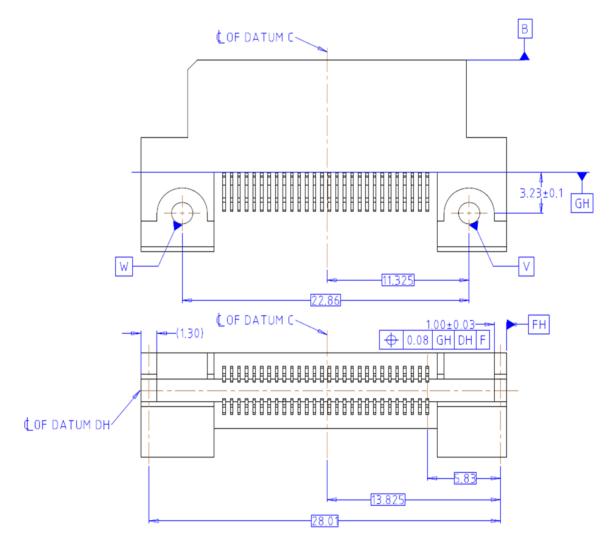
1C STRADDLE MOUNT CONNECTOR DIMENSIONS - REAR VIEW (MM)
